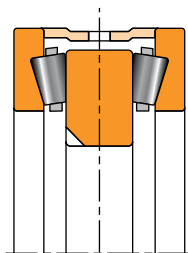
Typical TTDFLK assembly (with flat double inner raceways).
